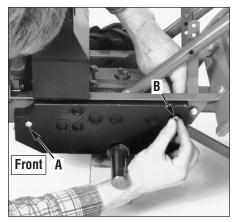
(A) 1/4" screw and flat washer. (B) 5/16" screw and flat washer.
